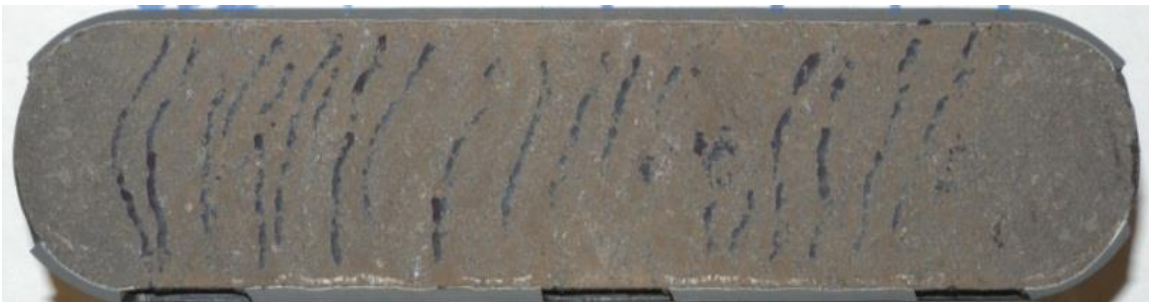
Fracture surface marked to show crushed asperities on a displaced fracture.
